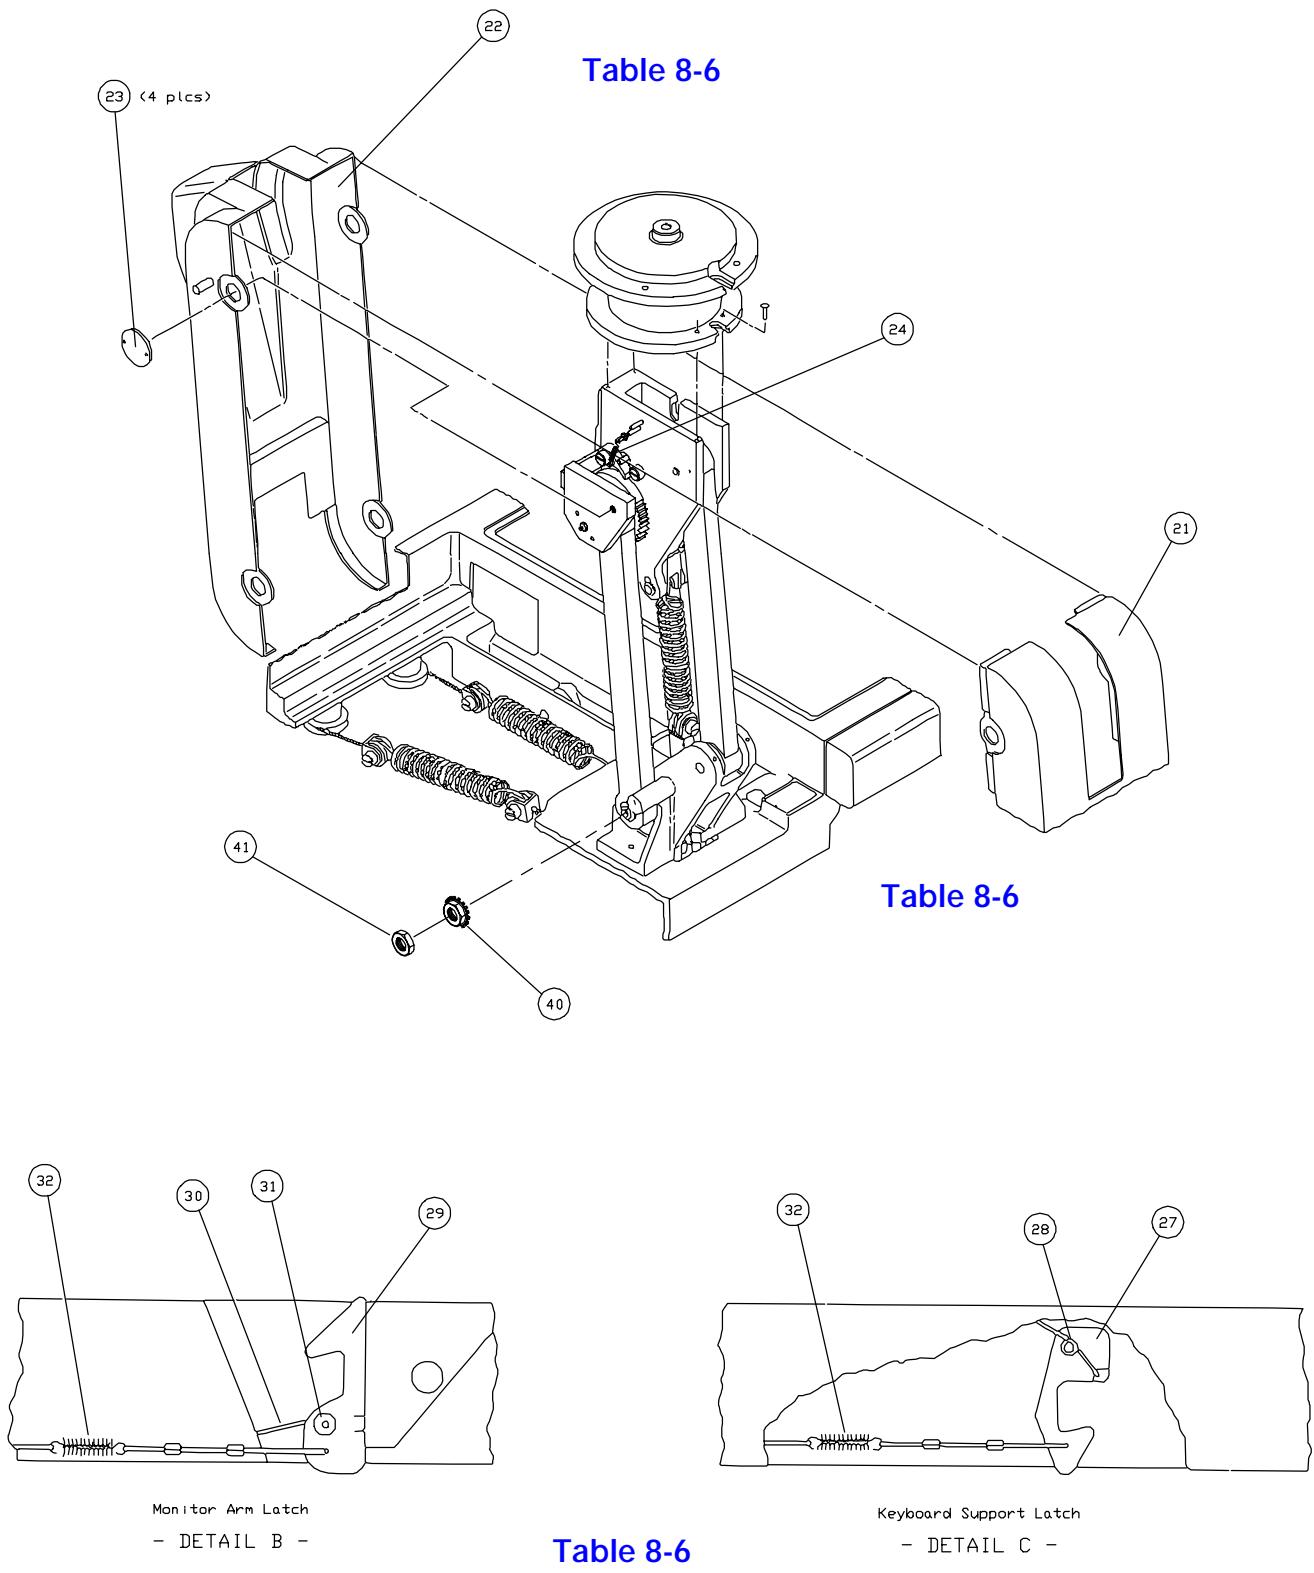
FHFC Optional Equipment Module Assembly (2 of 2)
